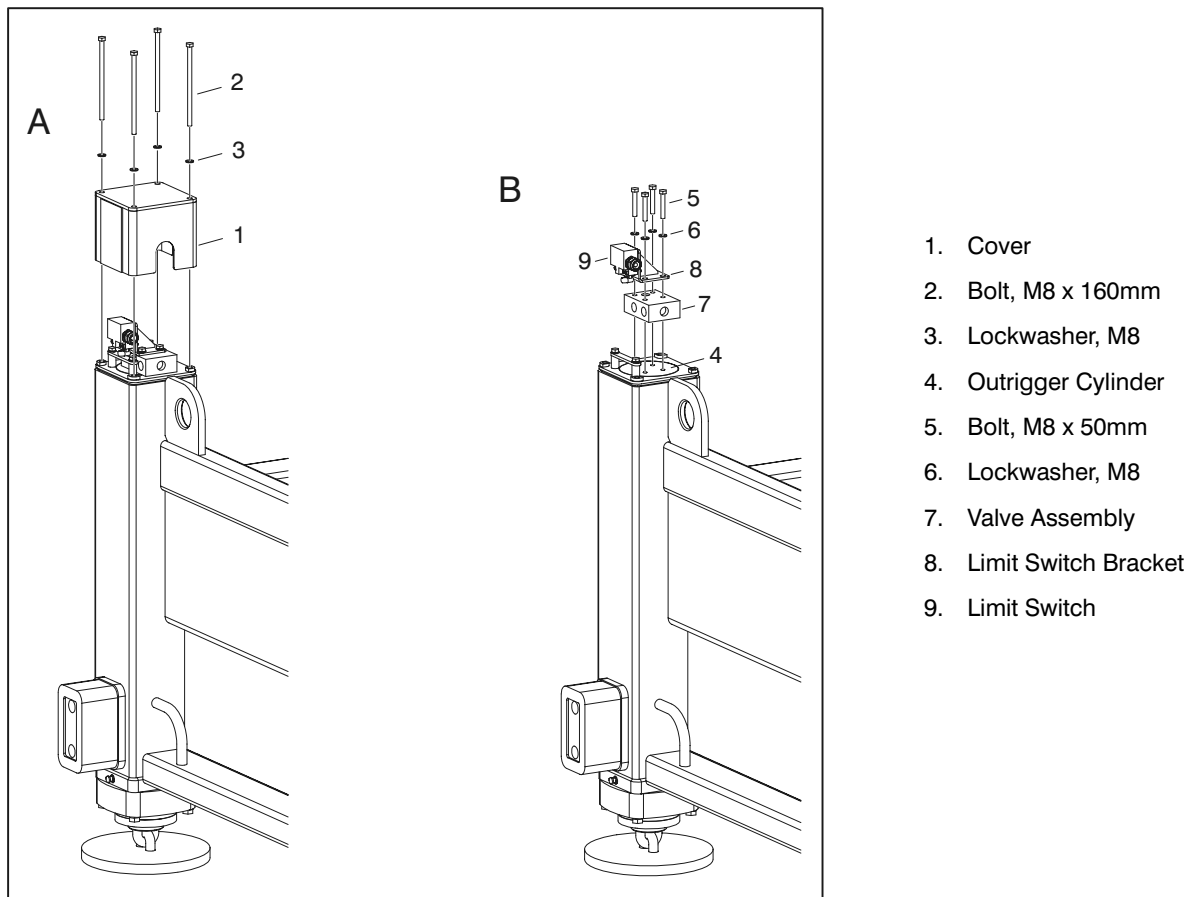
Outrigger Cylinder Removal - (Sheet 1 of 2)
